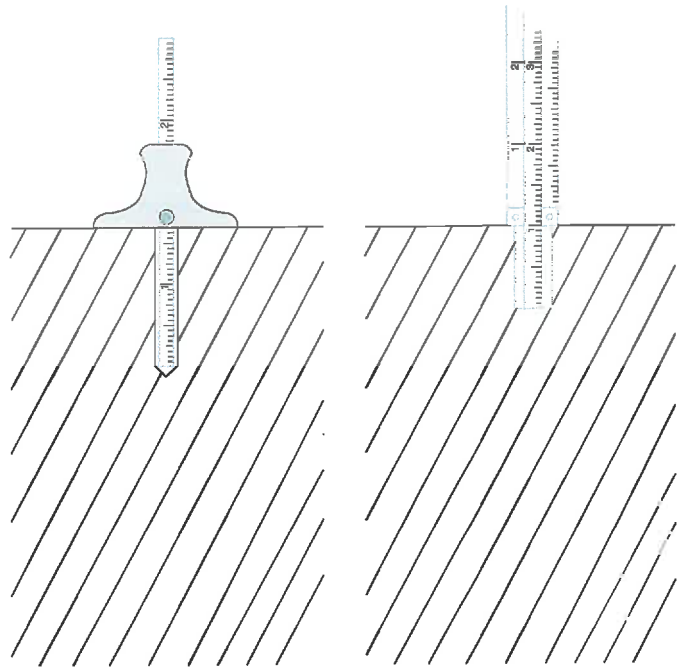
The depth gauge blade or rule extension measures hole depth. Read the dimension at the surface of the hole. (The L. S. Starrett Co.)
